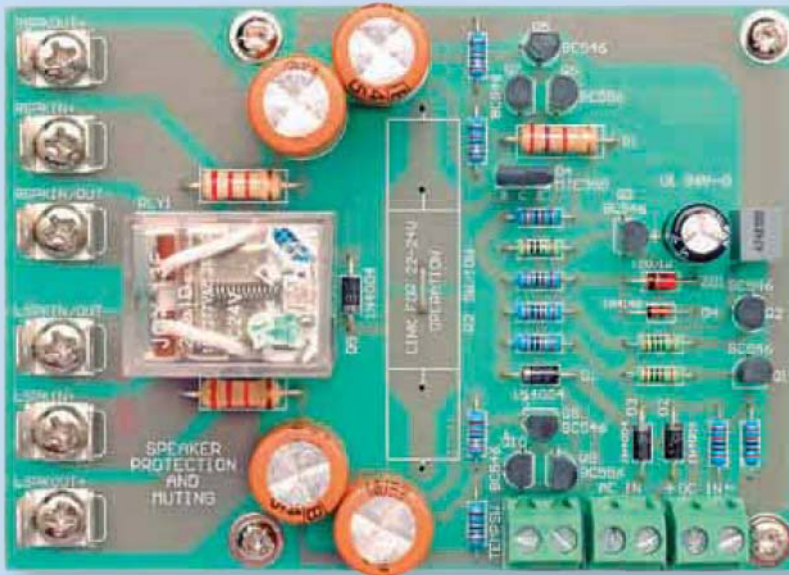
install the parts on the PC board as shown here, taking care to ensure that all polarised parts are correctly oriented. Also, make certain you use the correct transistor type at each location. Below is the completed PC board.
